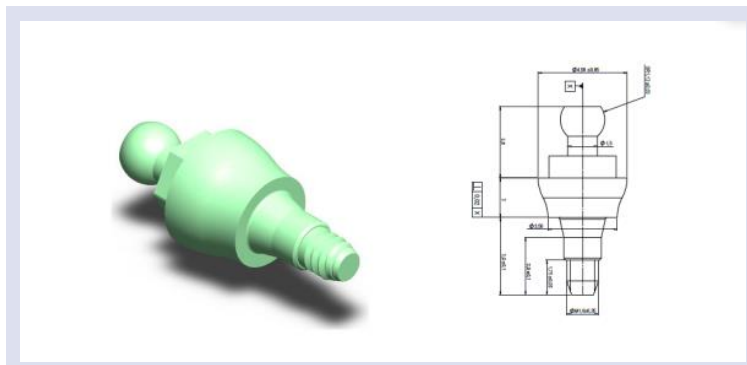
A) Three Dimensional View of the Ball Attachment B) Draft Drawing of the Ball Attachment
